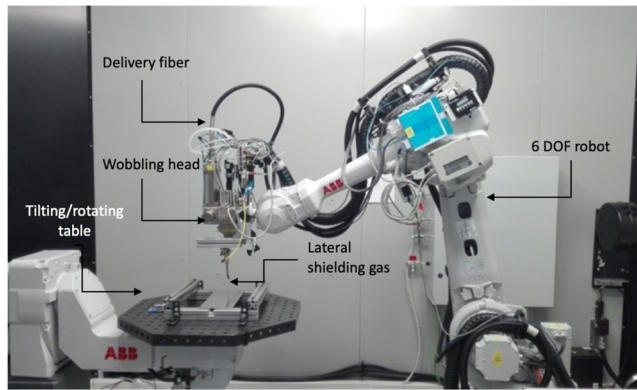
Robotic laser welding system used in the experimental study.
